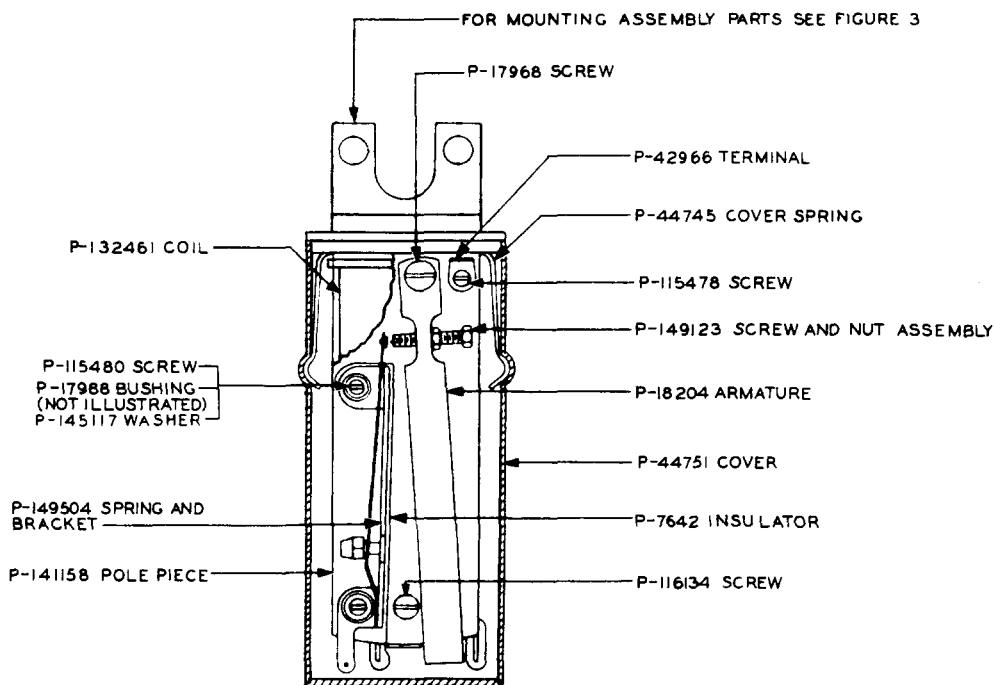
No. 85F Relay Having Screw and Nut Assembly in Armature
